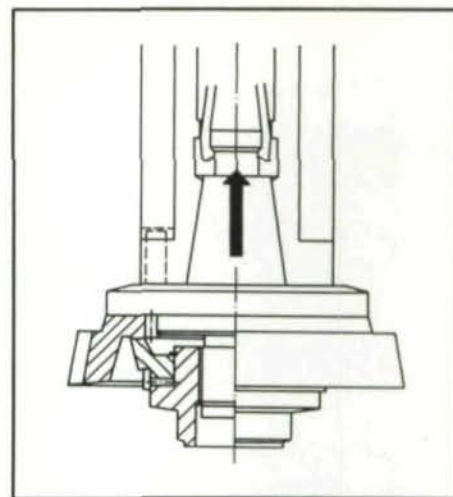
A—Automatic clamping of cutter and adapter to the cutter spindle.
